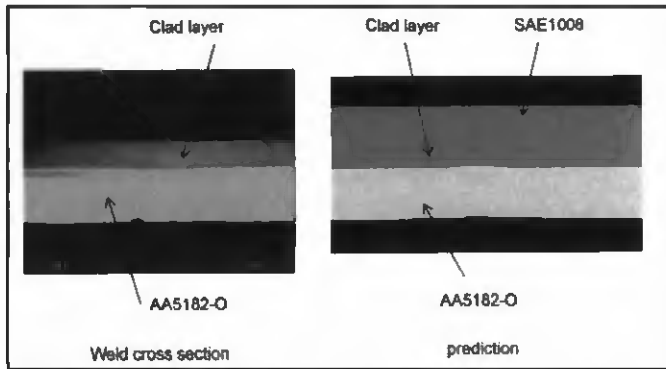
Weld structure at four cycles weld time: no melting observed. The steel sheet separated from the transition clad layer due to short weld time.
